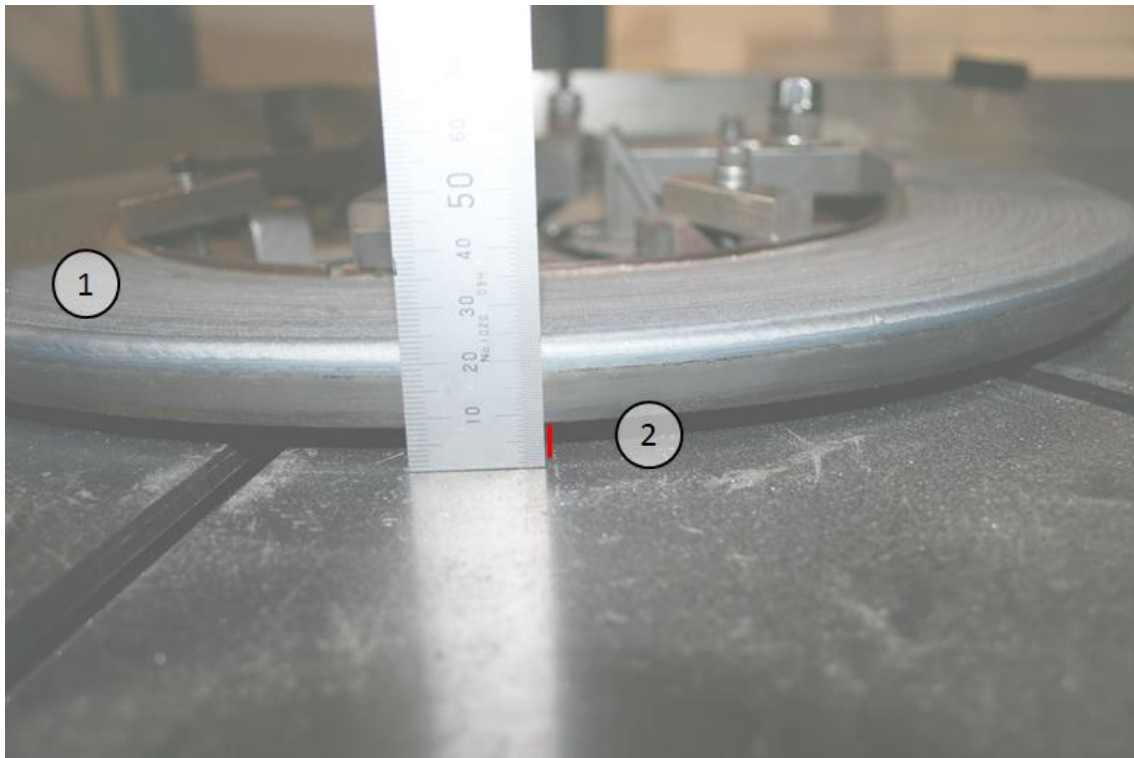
460 mm railway brake disc (non-ventilated), side view after first cladding; 1: wear surface; 2: lifted disc due to distortion (red line indicates the distance between the disc and the turntable)
